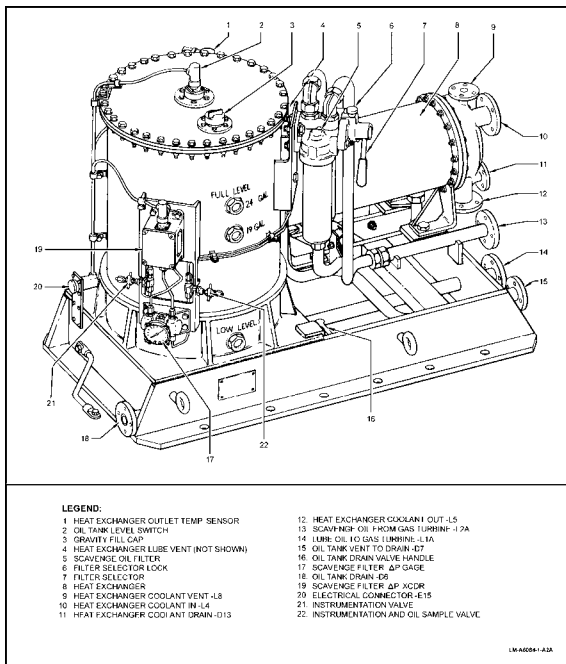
Lube Oil Storage and Conditioning Assembly
